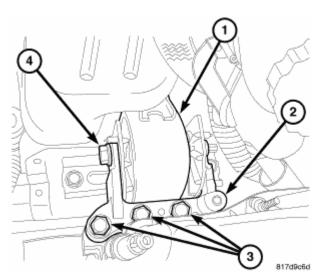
RIGHT ENGINE MOUNT Courtesy of CHRYSLER LLC
